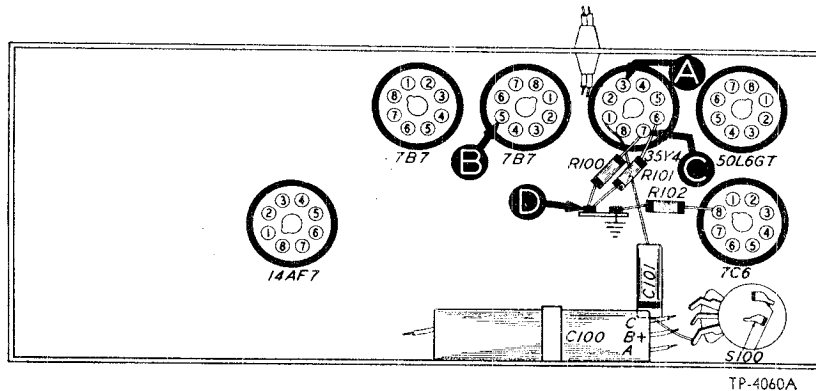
BOTTOM VIEW, SHOWING SECTION 1 TEST POINTS
